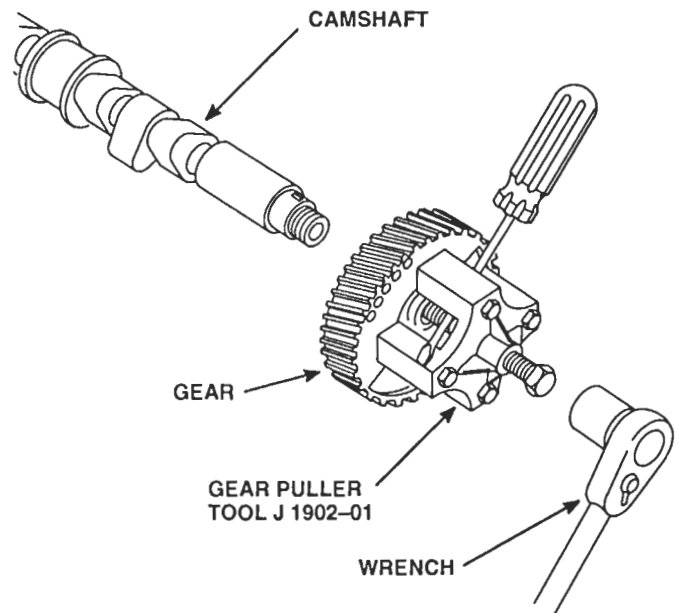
Removing Camshaft with Camshaft or Balance Shaft Gear Puller
